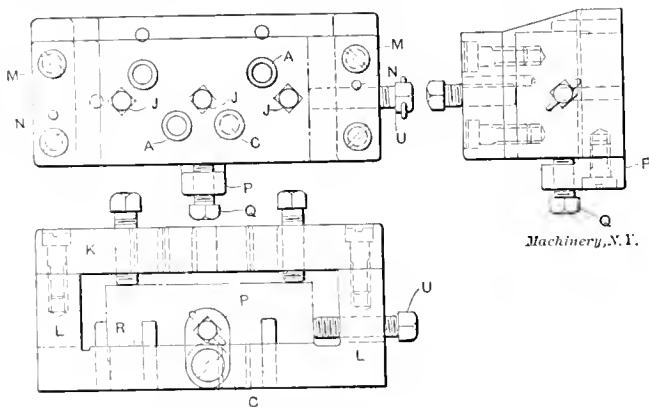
Further Improvements in Jig, suiting it to Manufacturing Purposes.
